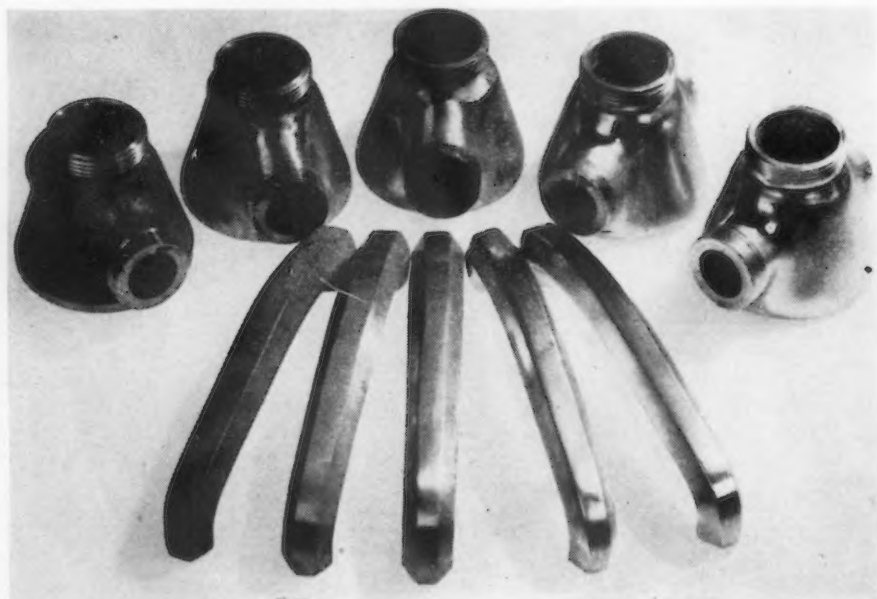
Finishing of these plumbing fixtures formerly required the four steps shown here. Operations have been reduced to three with belt finishing equipment and lubricants.
